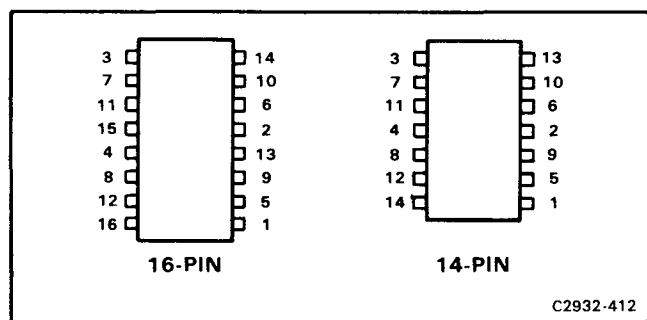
Recommended desoldering sequence for multi-pin devices.
